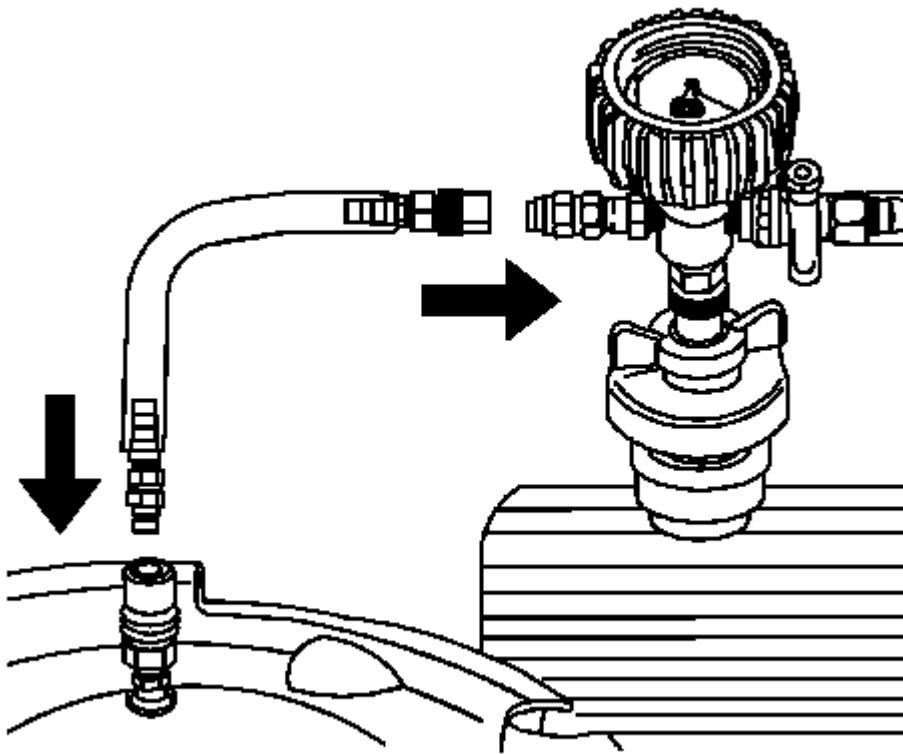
Attaching Vacuum Hose To Vacuum Gauge Assembly & Vacuum Tank
